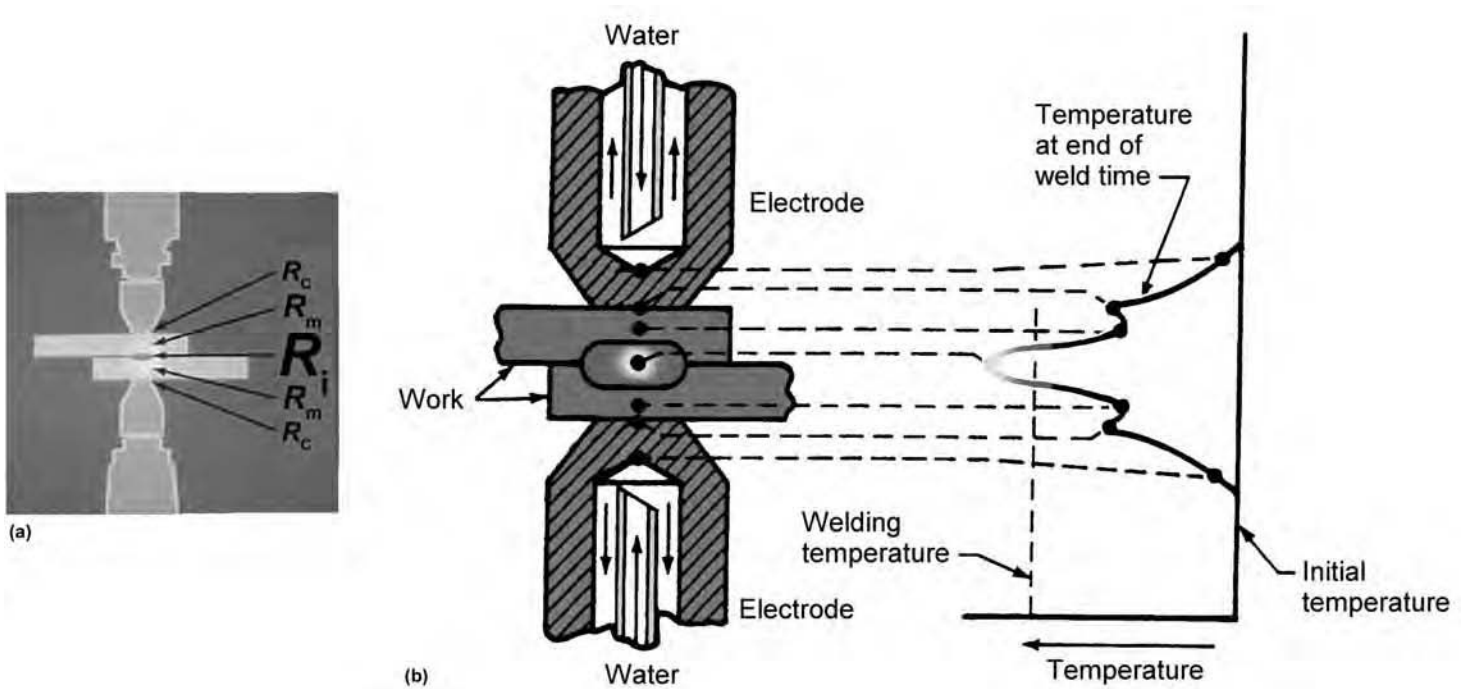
Resistance and heating profiles in spot welding. (a) The larger resistance at the interface (R_i) results in (b) greater heating and melting for a fusion weld at the interface between the two workpieces. R_c , surface contact resistance; R_m , resistance of the metal
